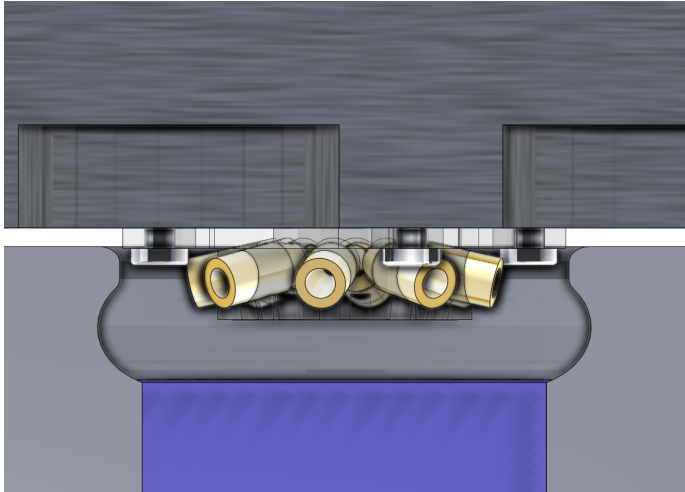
Cut section view of DFI device installed in the optical engine.
